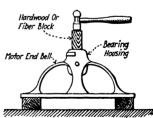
Diagram showing method of driving out bearing shell from a housing in a motor end bell.
